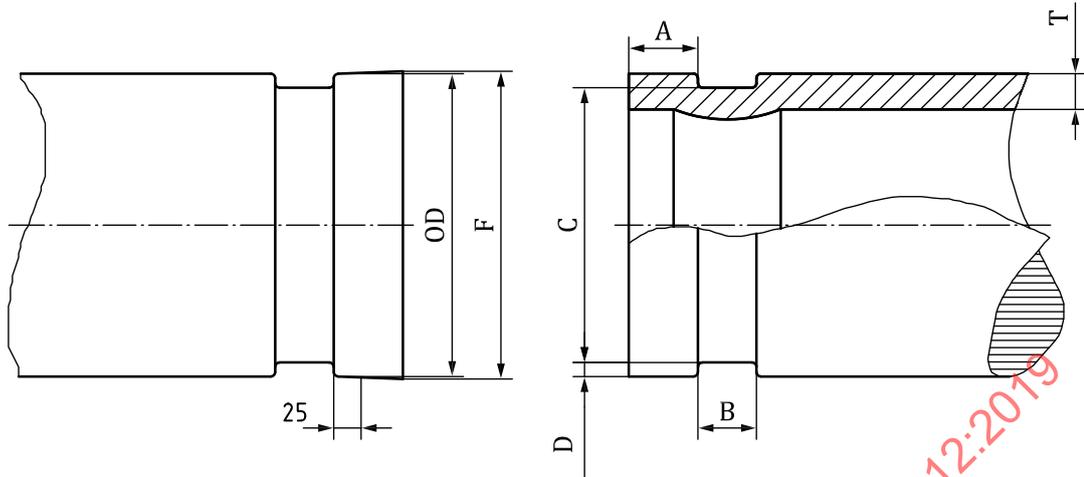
Roll grooved-end dimensional reference points from [Tables A.1](#), [A.2](#) and [A.3](#)
